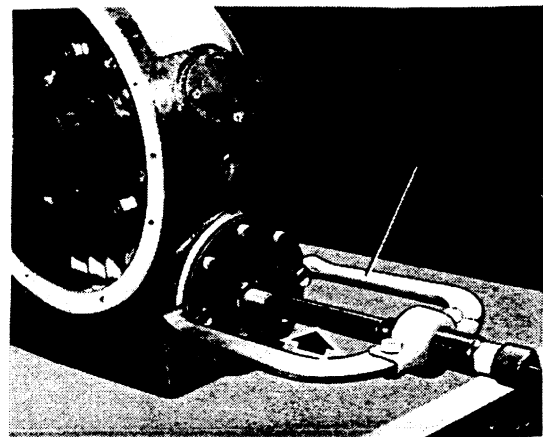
Removing wormshaft outer taper roller bearing outer race
